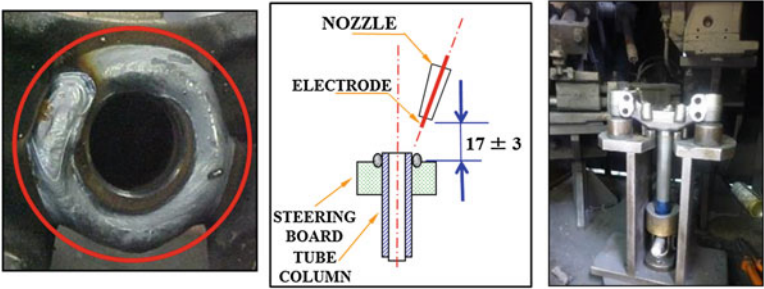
Weld bead of the displaced steering column (left), diagram of the welding process with alignment by the fork holes (center and right)
